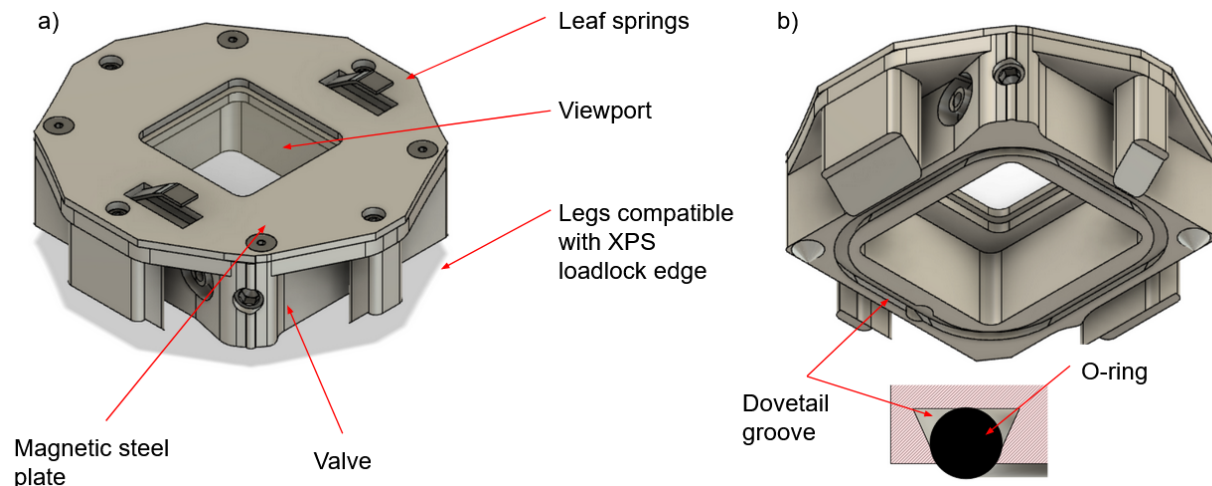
a) Top view of solution cover with main features indicated. Further explanation of each follows below. b) The O-ring sealing cover and base is mounted in a dovetail groove to prevent it from falling out, whenever the cover is lifted off the base.
